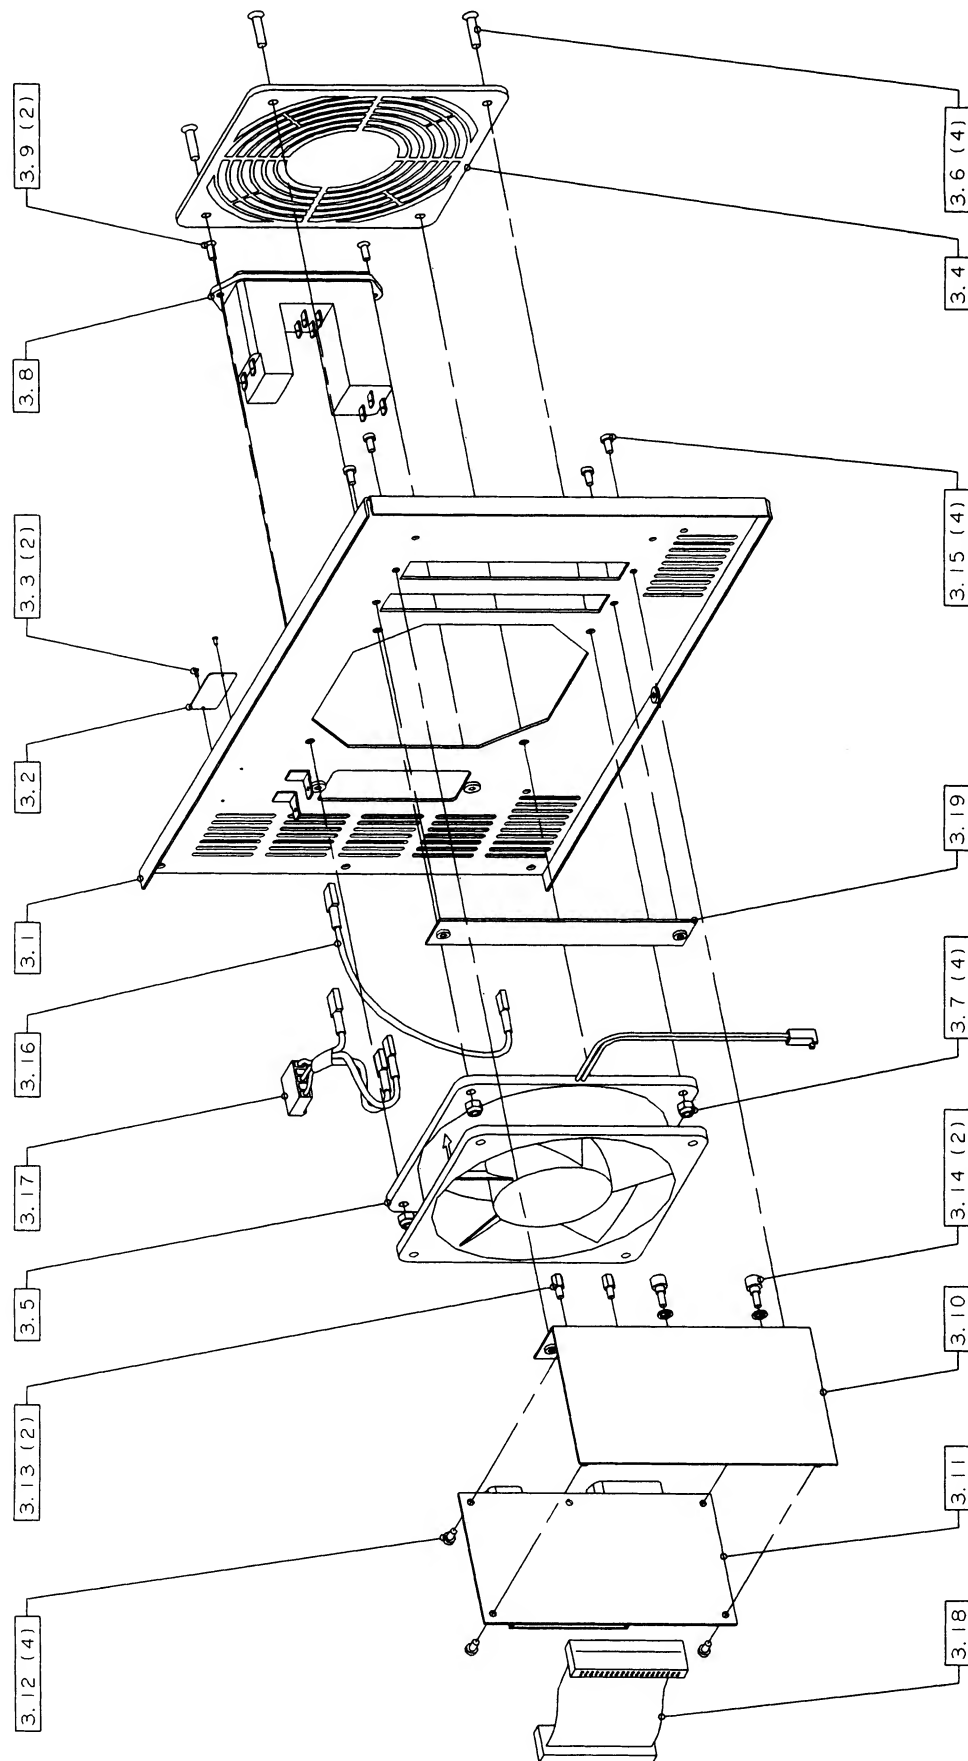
9320 REAR PANEL EXPLODED VIEW
